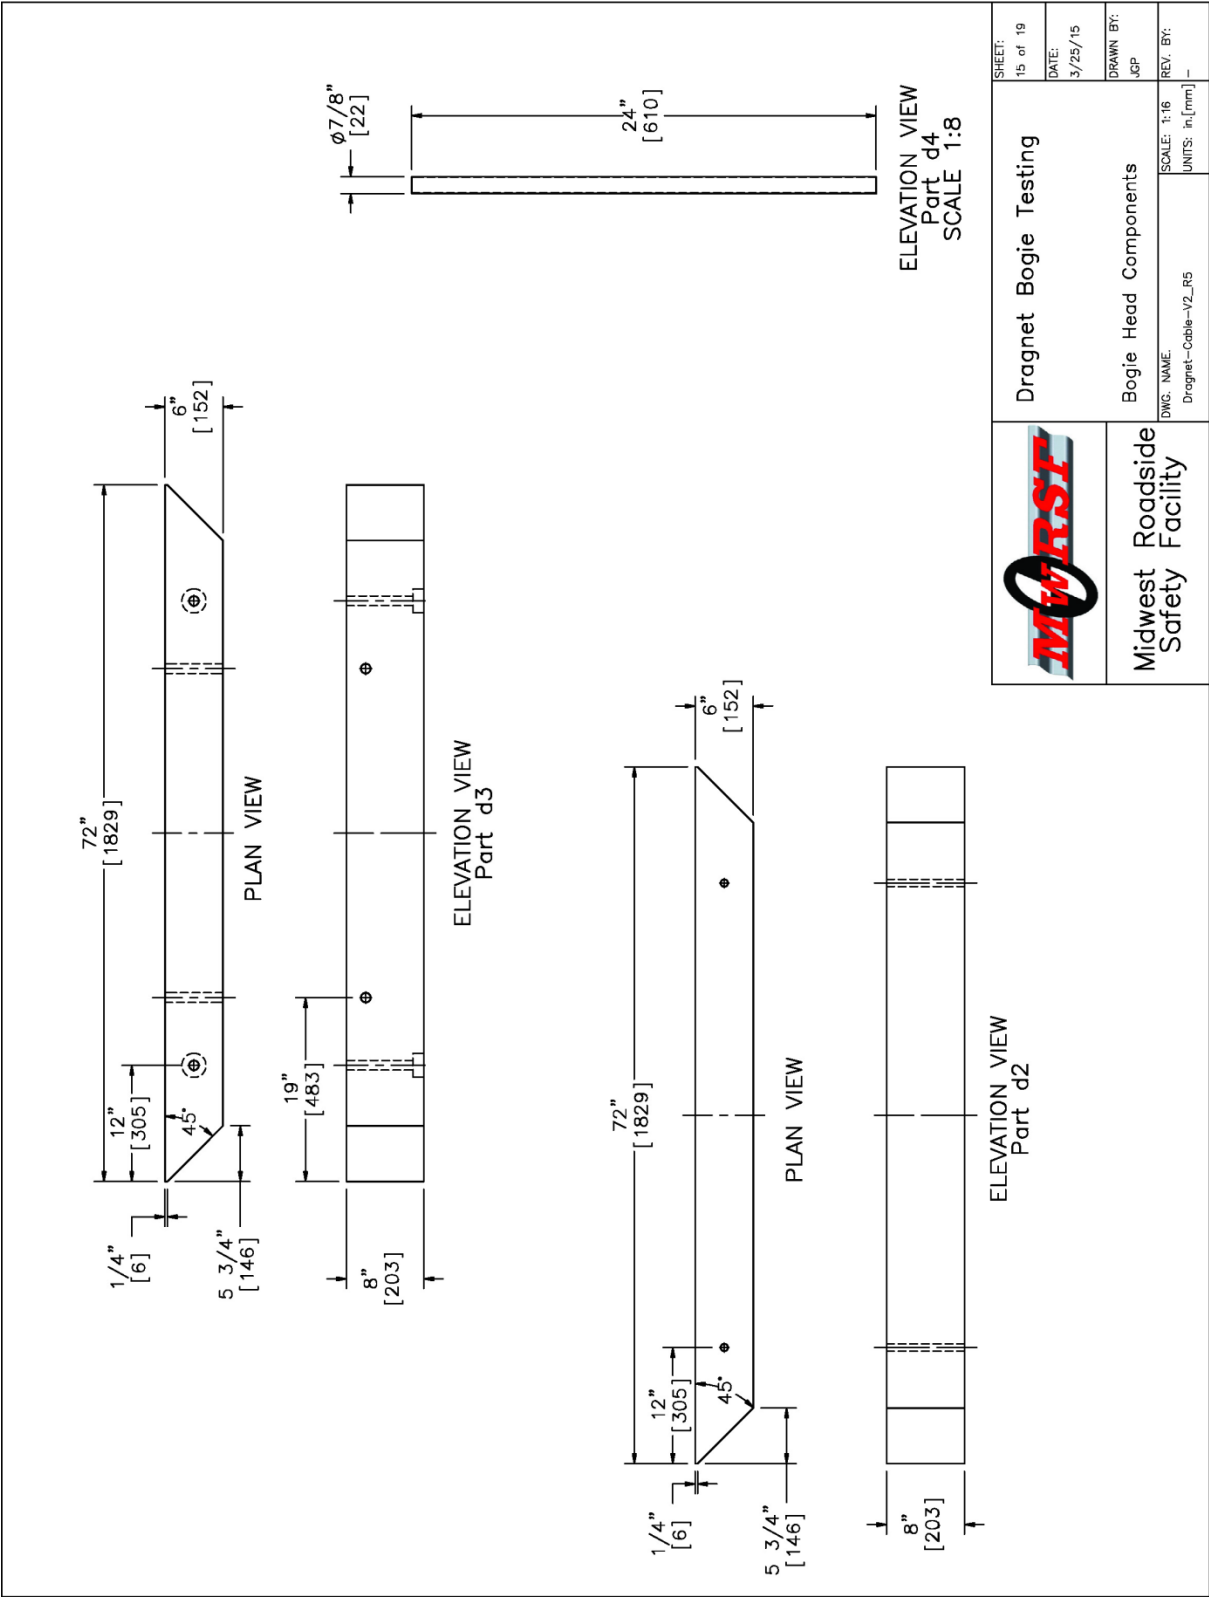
Bogie Head Components, Test Nos. IRA-3 and IRA-4
